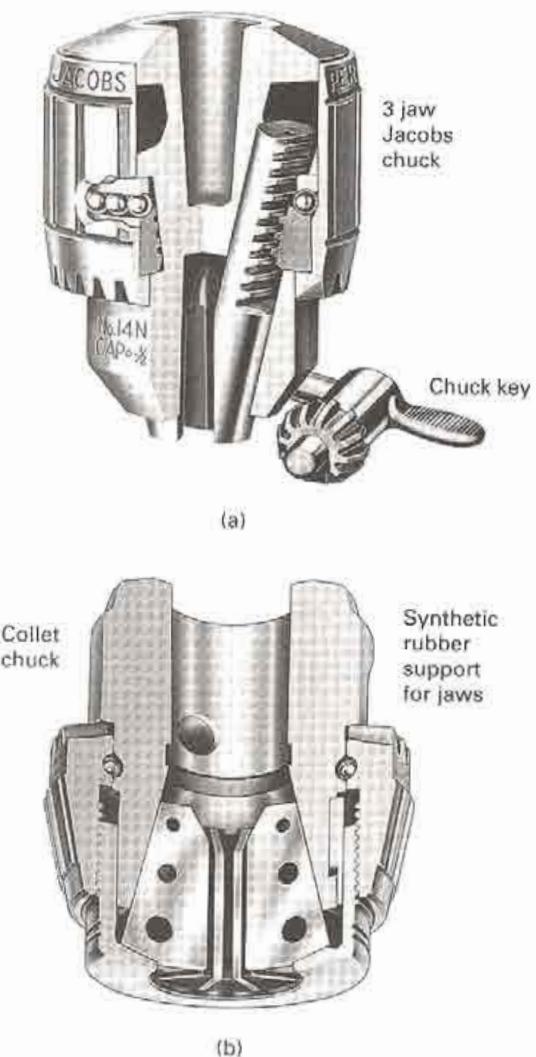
Two of the most commonly used types of drill chucks are the 3-jaw Jacobs chuck (above) and the collet chuck with synthetic rubber support for jaws. (Courtesy of Jacobs Manufacturing Company.)
